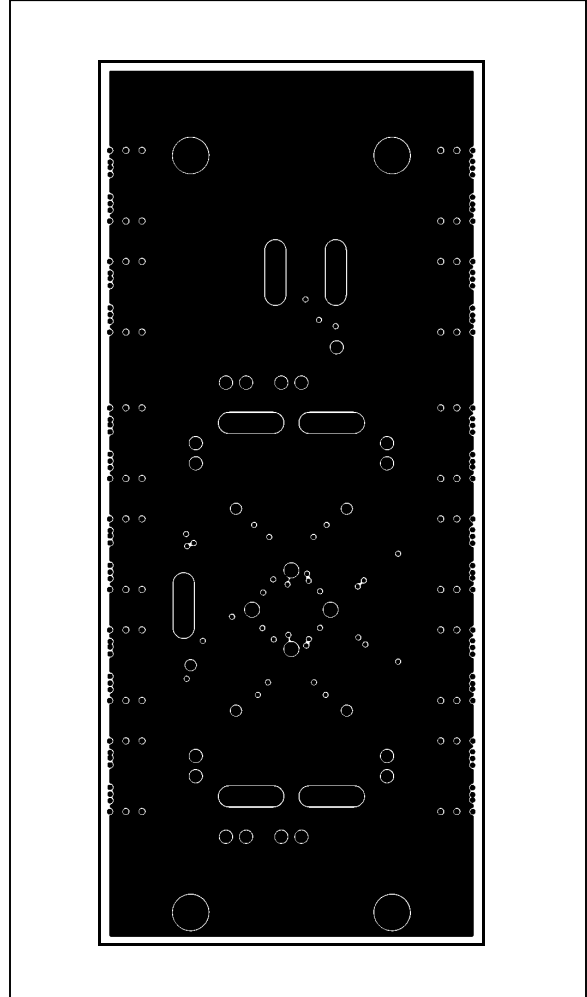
MAX3841 EV Kit PC Board Layout—Power Plane
